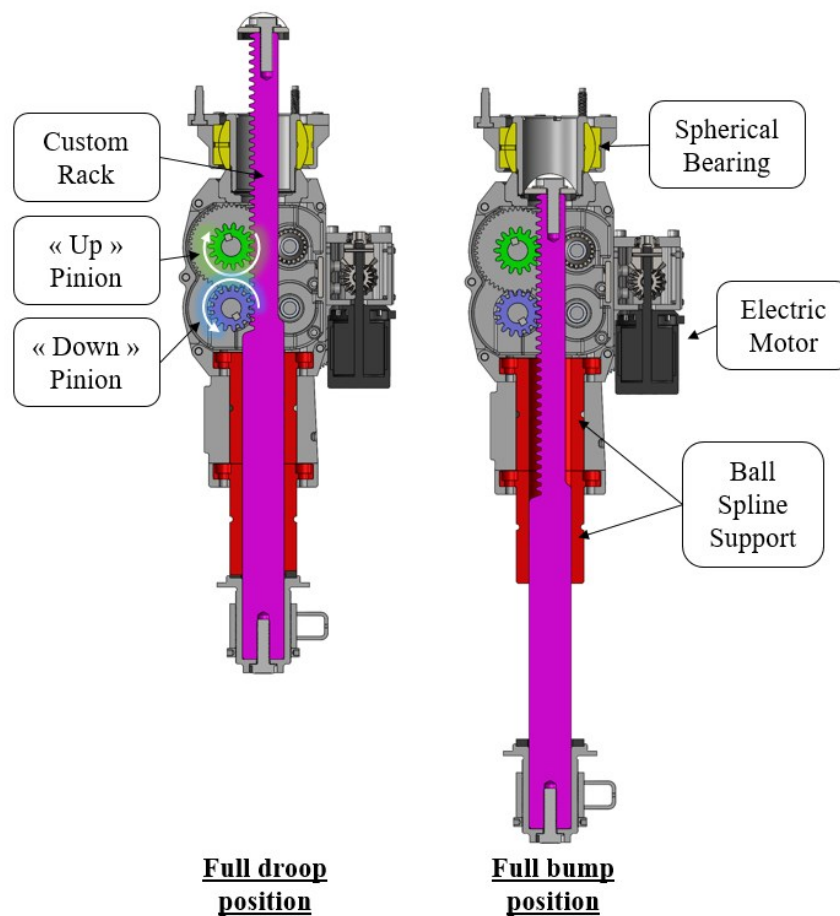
Cut View of the Actuator in Fully Compressed and Fully Out Position (Spring Removed).
